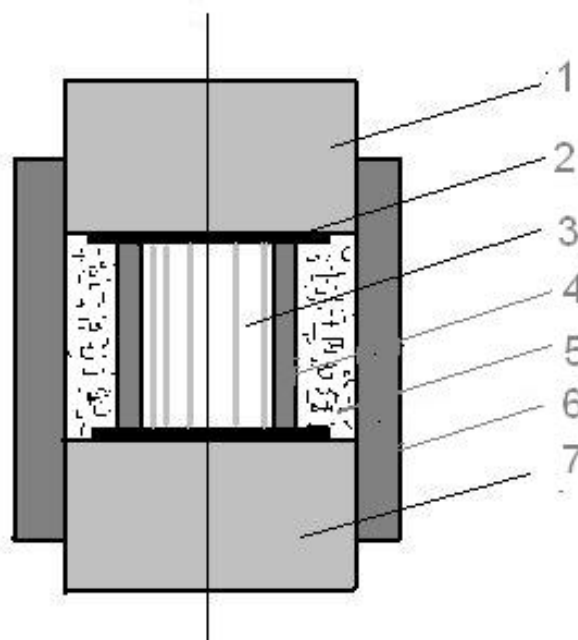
Assembly scheme of a container with a specimen for compression: 1 – upper deforming anvil; 2 – lubricant layer; 3 – specimen; 4 – asbestos insulation; 5 – kaolin wadding; 6 – steel container; 7 – lower deforming anvil.
